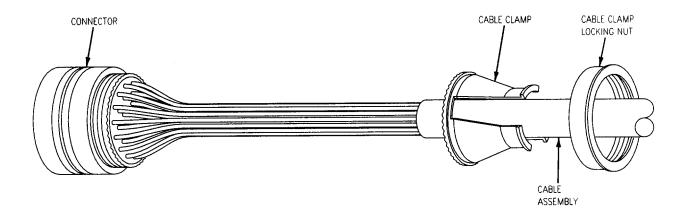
Installing Cable Clamp Locking Nut and Cable Clamp on Cable Assembly
